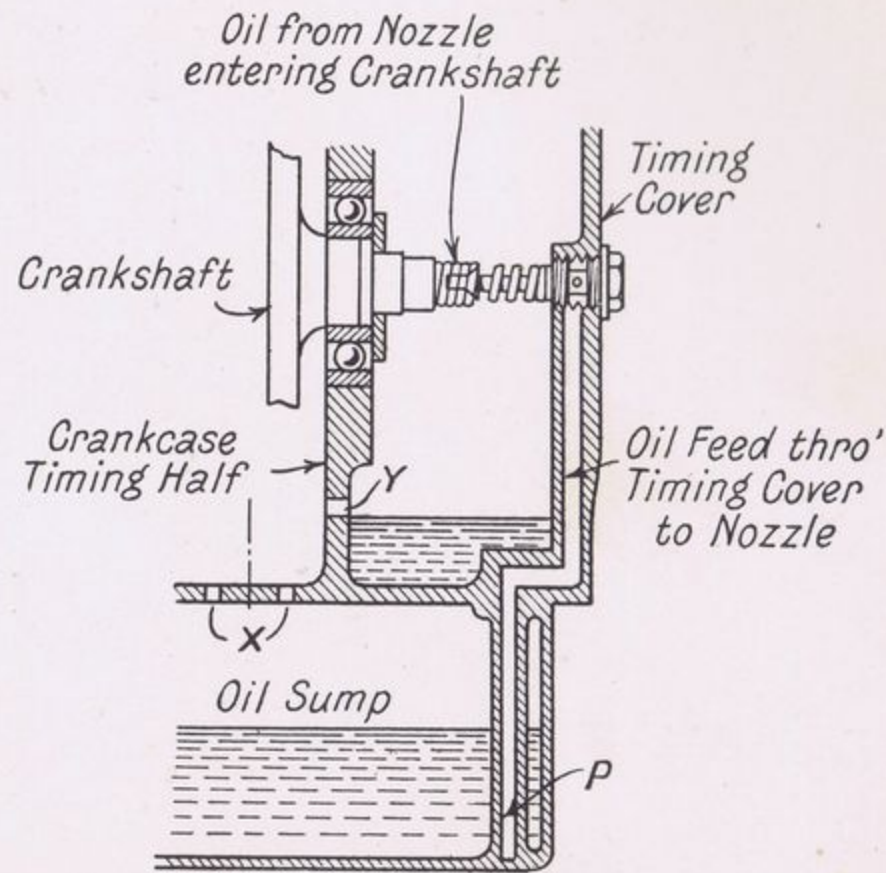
DETAIL SHOWING OIL FEED TO CRANKSHAFT AND TIMING GEAR ON 1930 D.S. LUBRICATED MODELS
